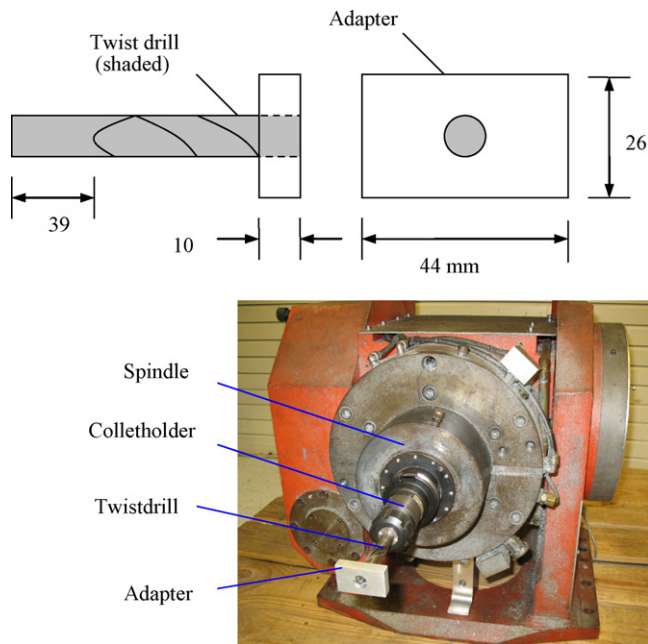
Twist drill and aluminum measurement adapter geometries. The inset shows a photograph of the adapter-drill-holder clamped in the test spindle.
